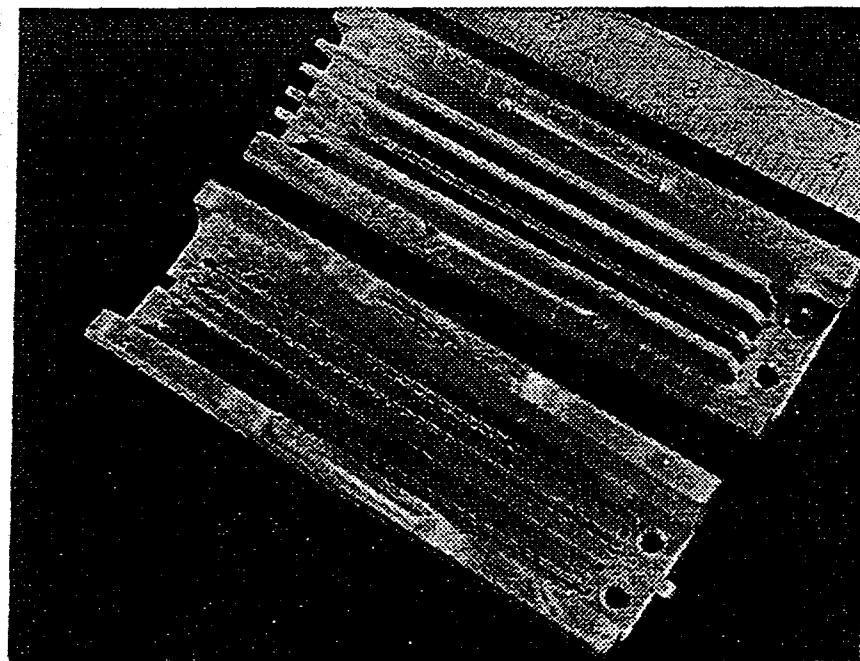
Microplates loaded in the capsule prior to final assembly and welding.
